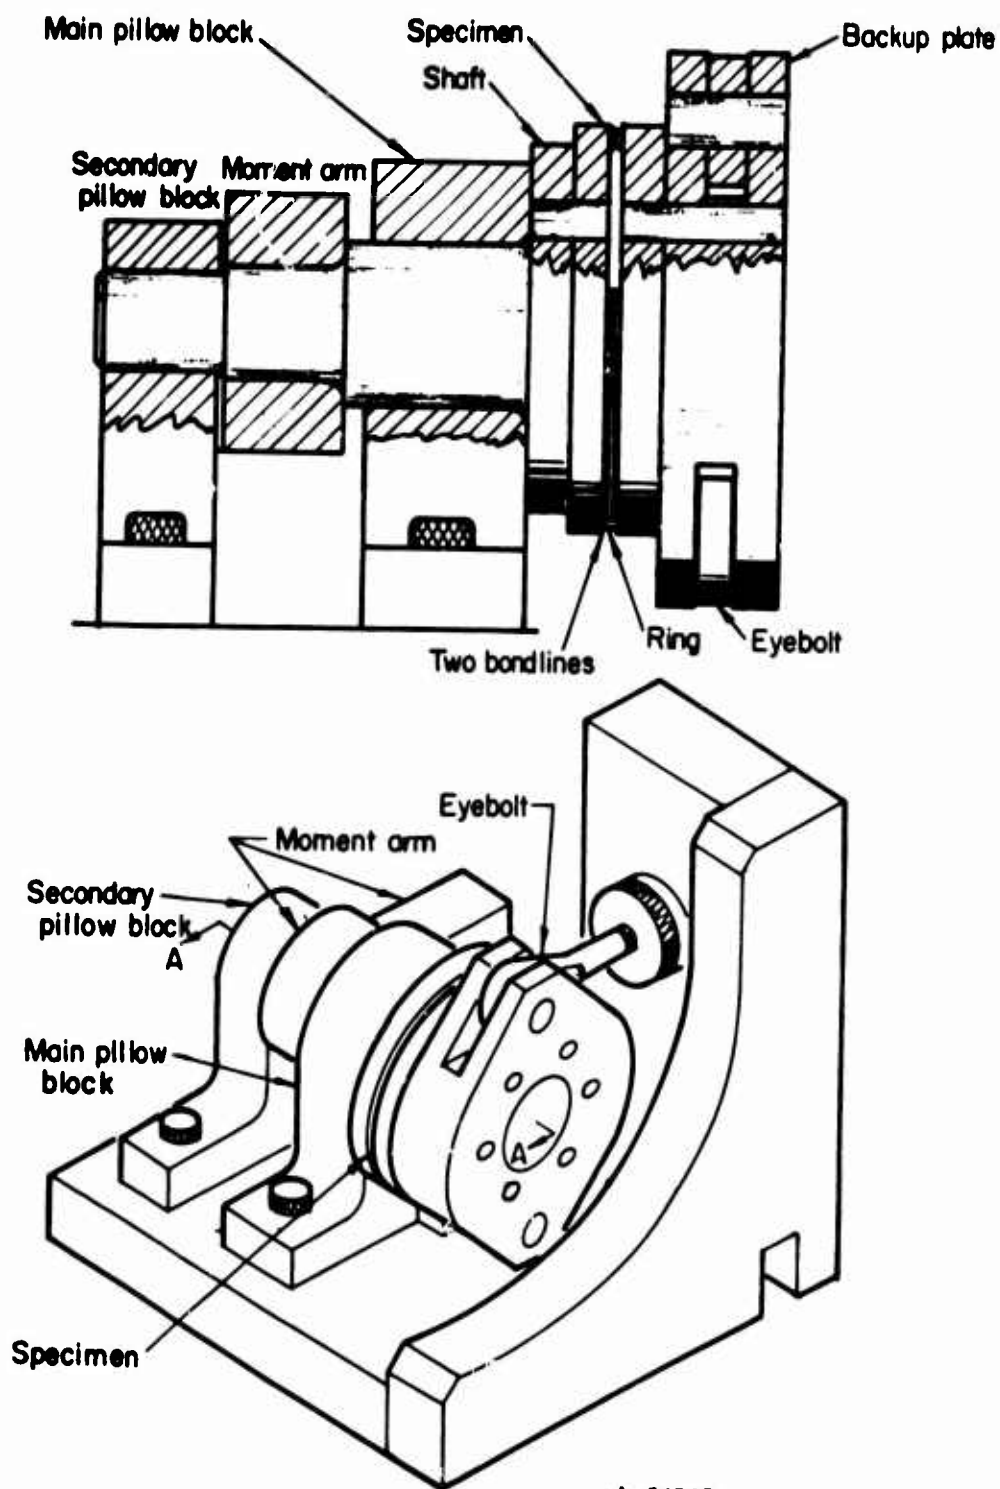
TORSIONAL SHEAR JIG (REF. 65)
